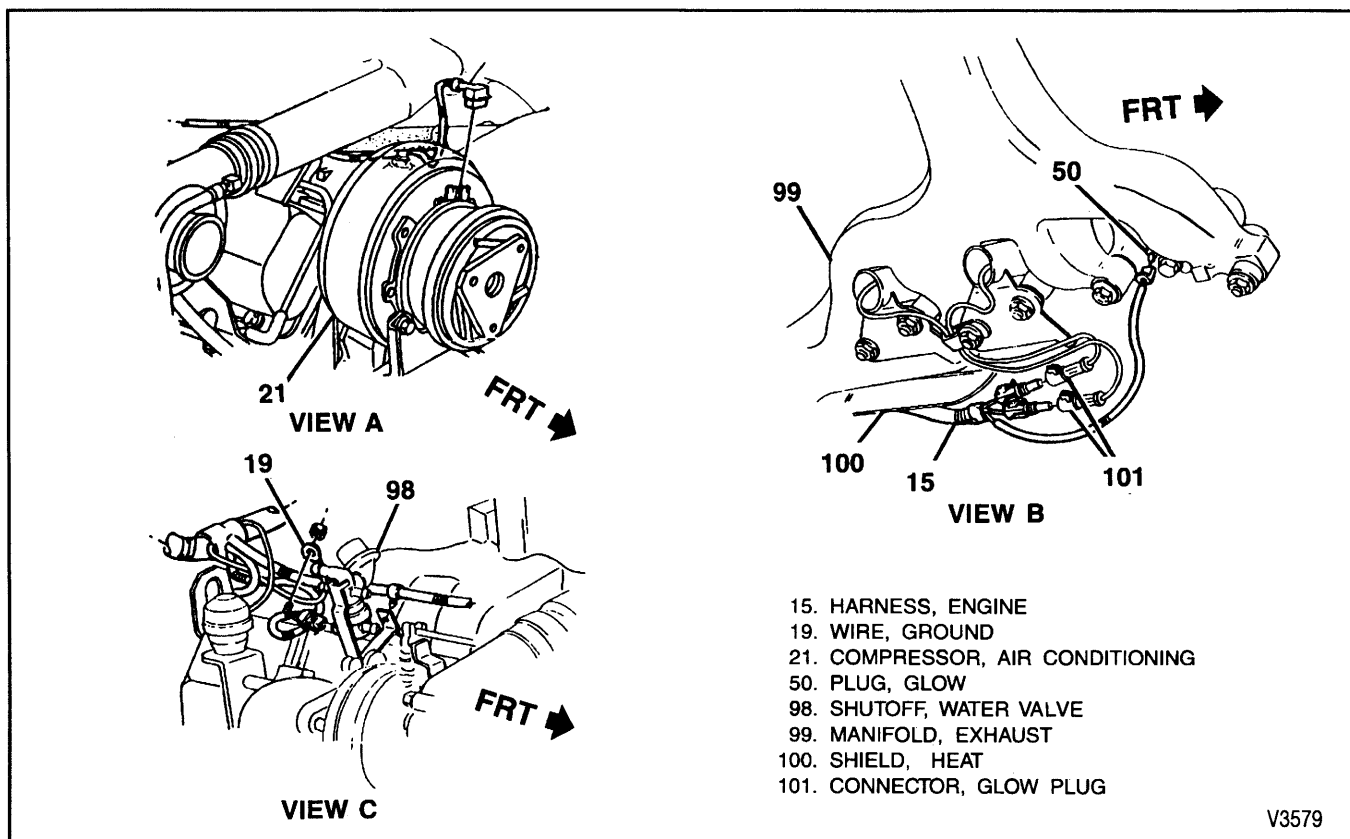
Engine Wiring - Right Side Views (6.5L Diesel)
